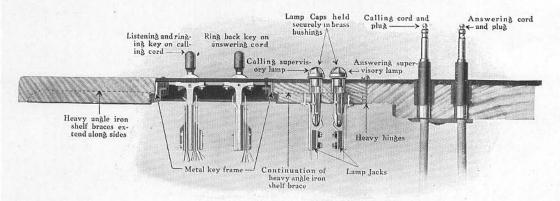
Cross Section of Plug and Key-Shelf
